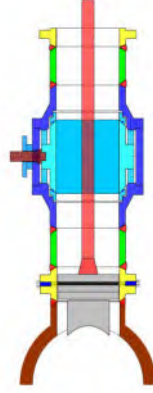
Feed alignment check of customers hot tap weld branch assembly
